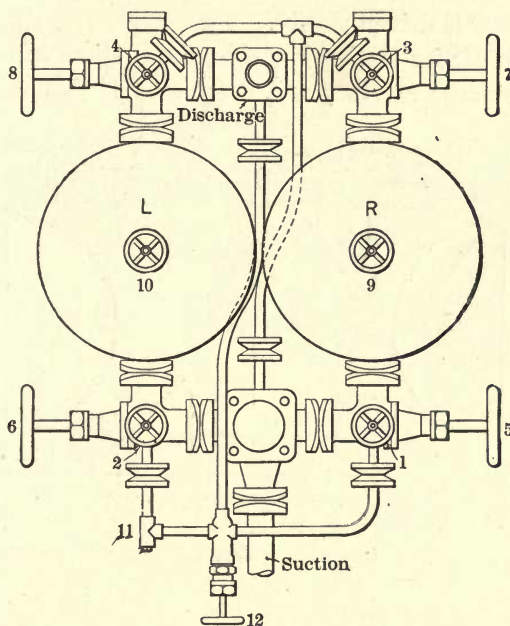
Frick Manipulating Valves for Small Compressors.
